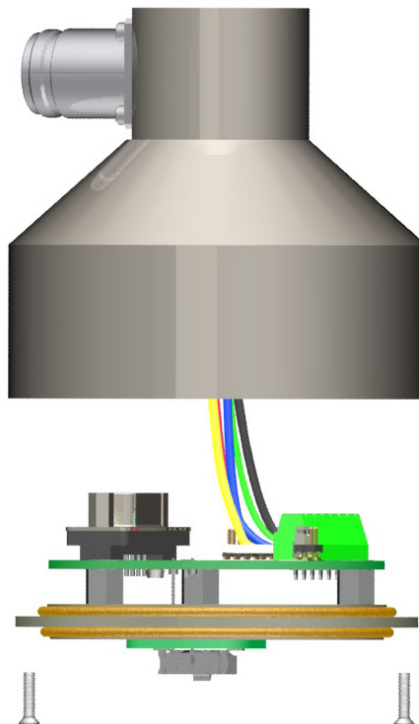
Remove the Two Flat Phillips Screws to Expose the PCB
